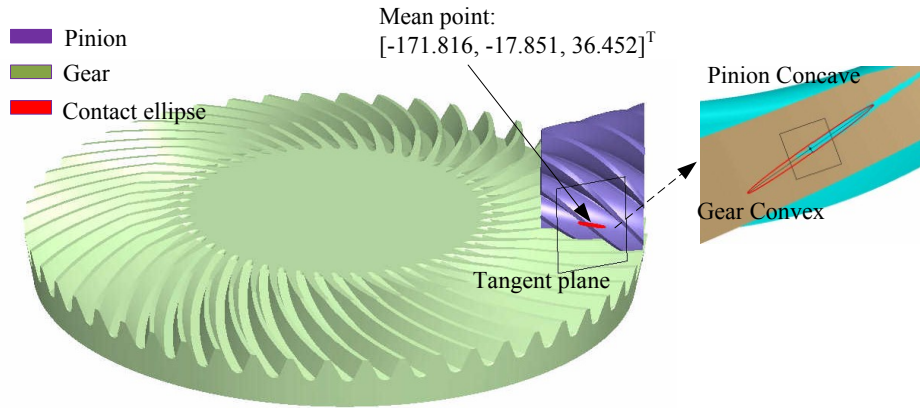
Tooth contact of genuine spiral bevel gears.
